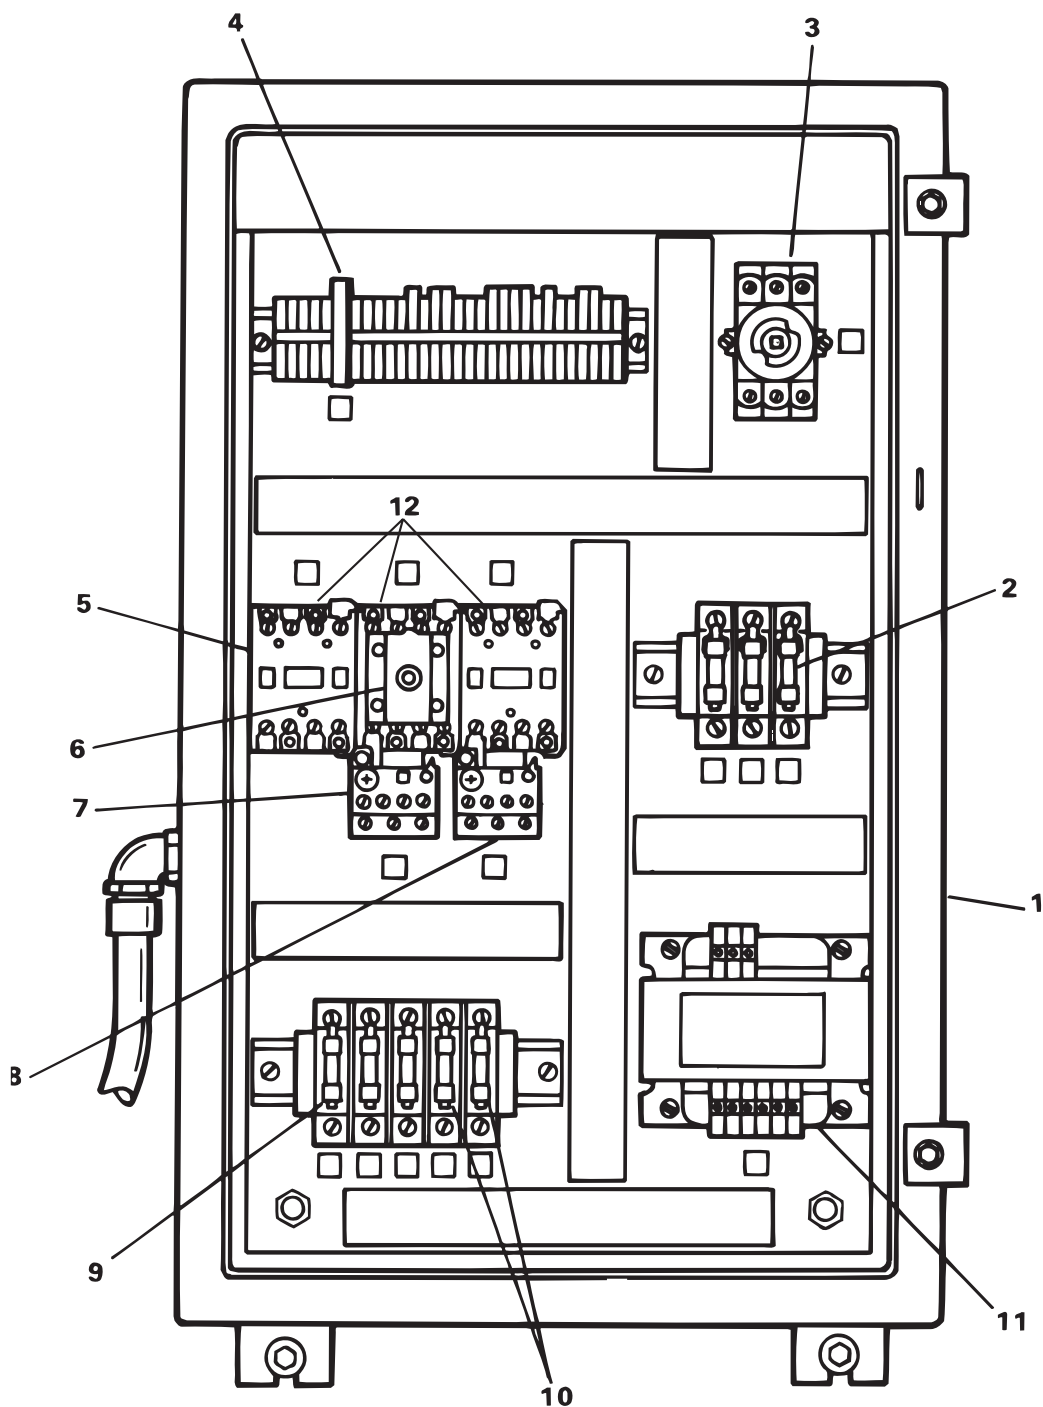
FIGURE O - ELECTRICAL CONTROL ENCLOSURE (NON-CE MACHINES)
